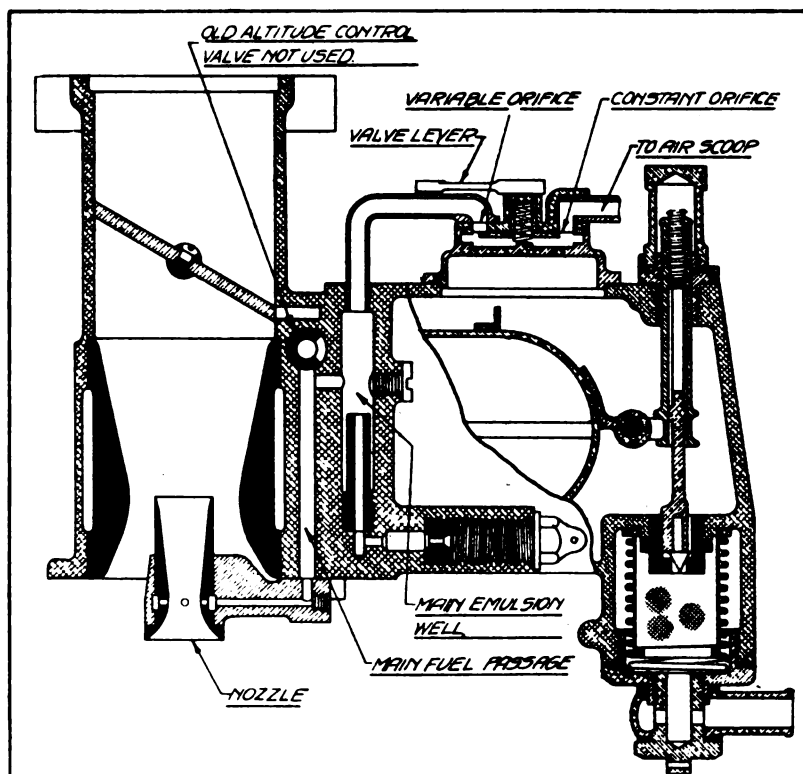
Type "G" control fitted to Packard carburetor on Packard Model 1A-744 Aviation engine.
